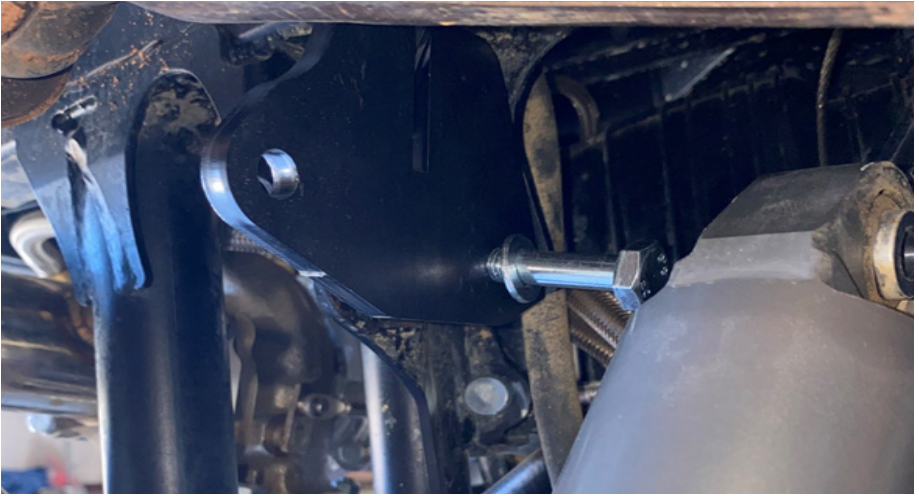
Place REAR - Inner Lift Bracket (4) into place with M10-1.5 x 65mm Flange Bolt (A)
